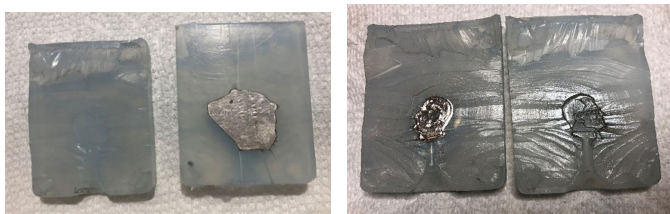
and 55: Silicon mold poured with a soft metal core to make a hybrid mold (left) and hybrid core with outside walls removed (right)
